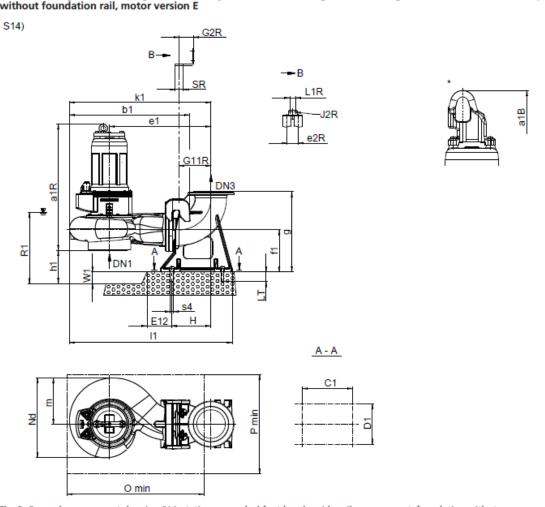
General arrangement drawing S14, stationary on duckfoot bend, guide rail arrangement, foundation with step, without foundation rail, motor version E
